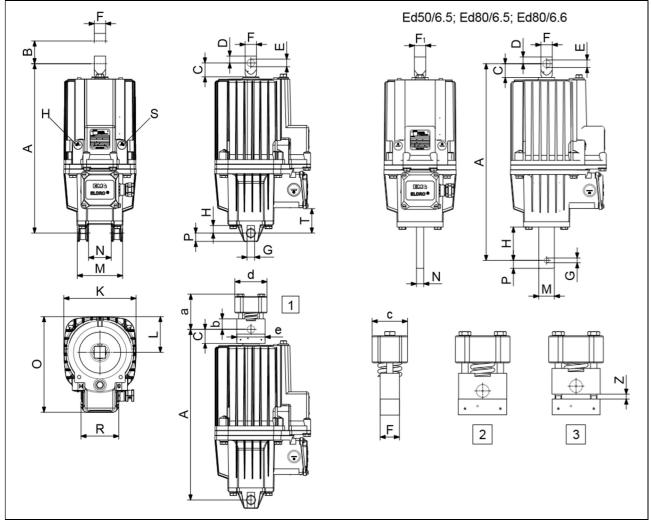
Dimensional drawing – example: Type Ed 50/6; Ed 80/6.5; Ed 80/6.6
